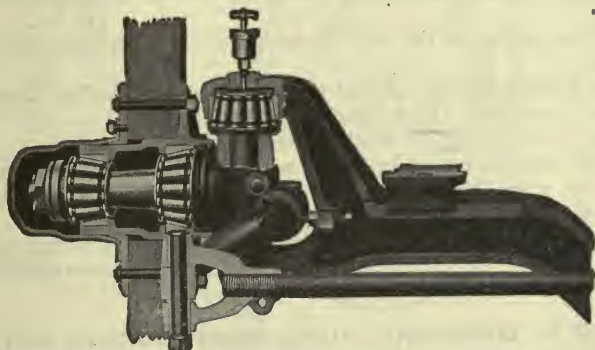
Application of Timken Roller Bearings to the Spindle and to the Knuckle Head.
